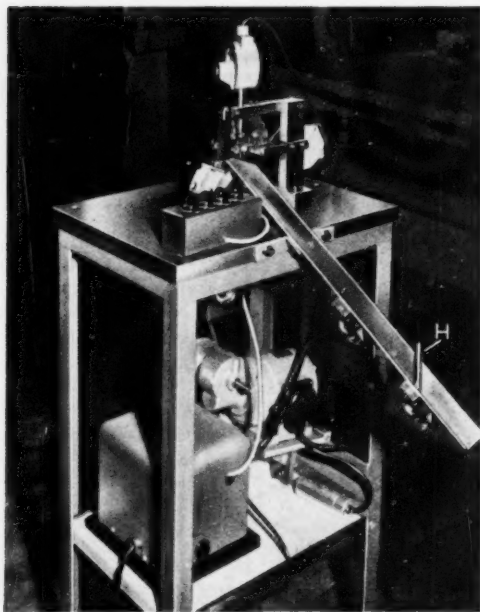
This Special-purpose Machine, Designed and Built by C. E. Johansson, and Incorporating Two El-Mikrokators, will Automatically Check and Grade Taps at the Rate of 20 to 40 per min.
